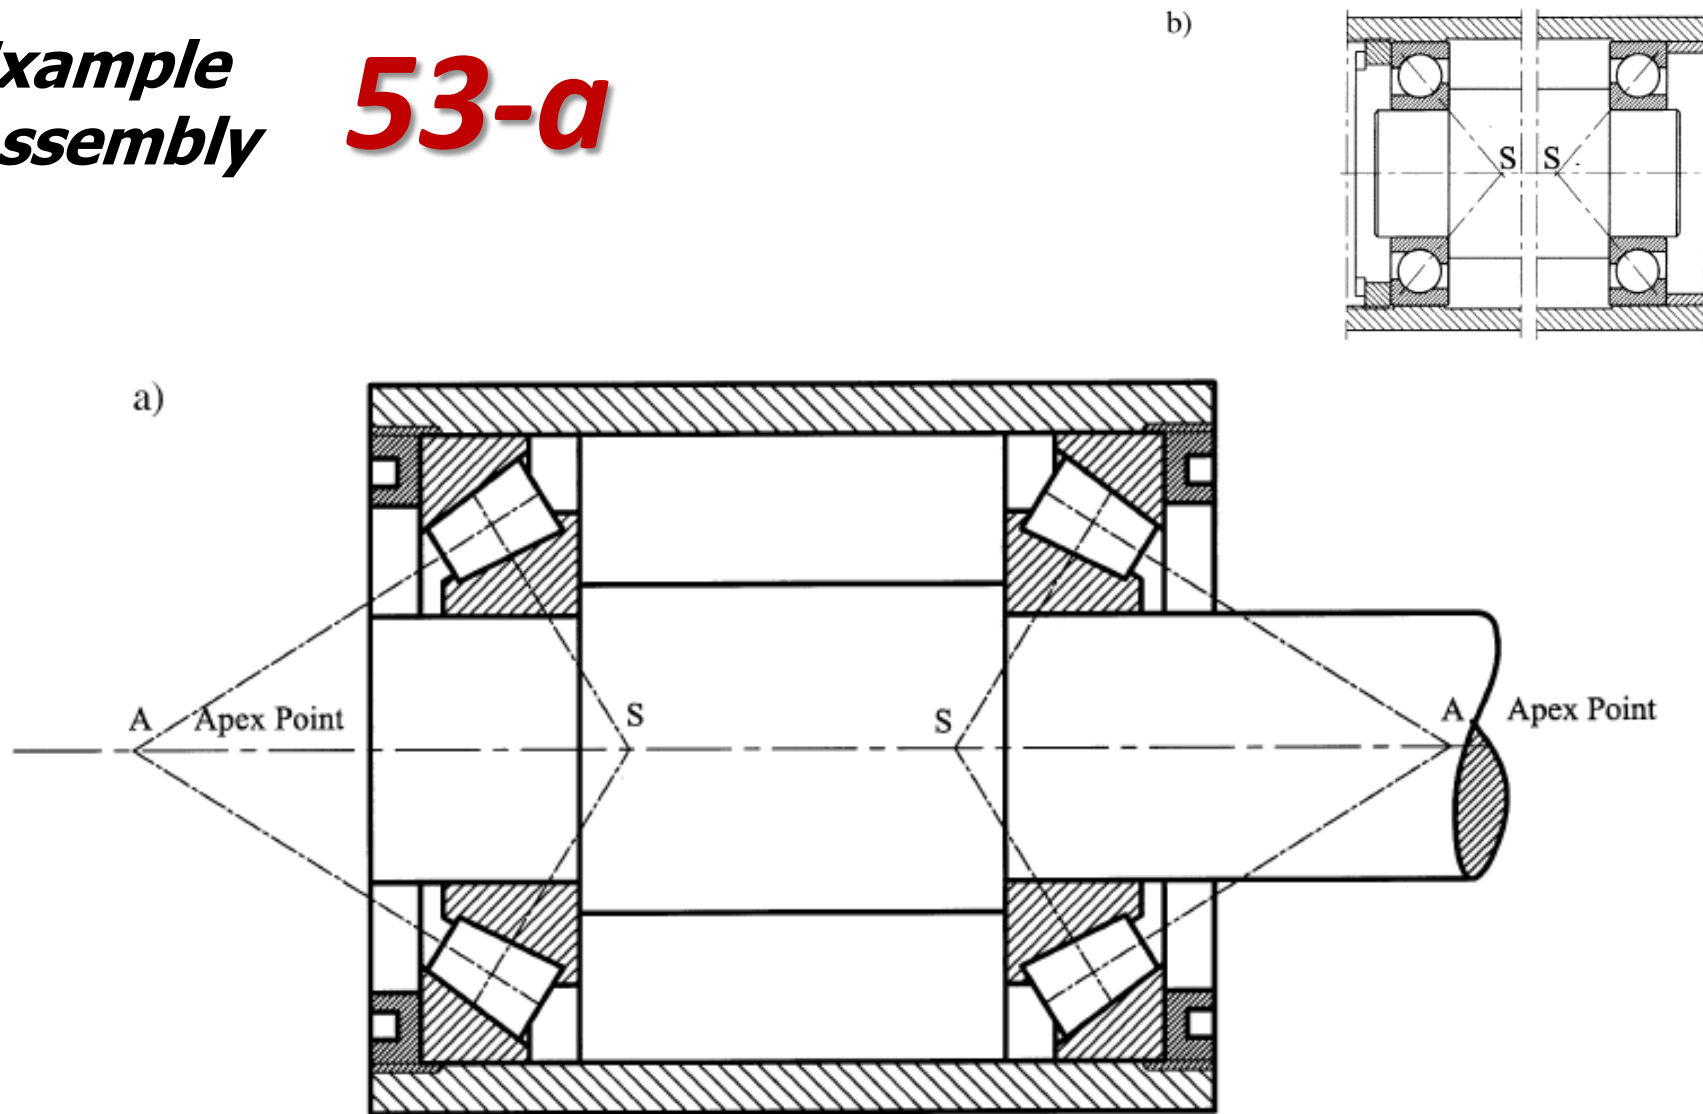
(a) Adjustable arrangement, apex points outside the two bearings. (b) Similar adjustable arrangement for angular contact bearings.
